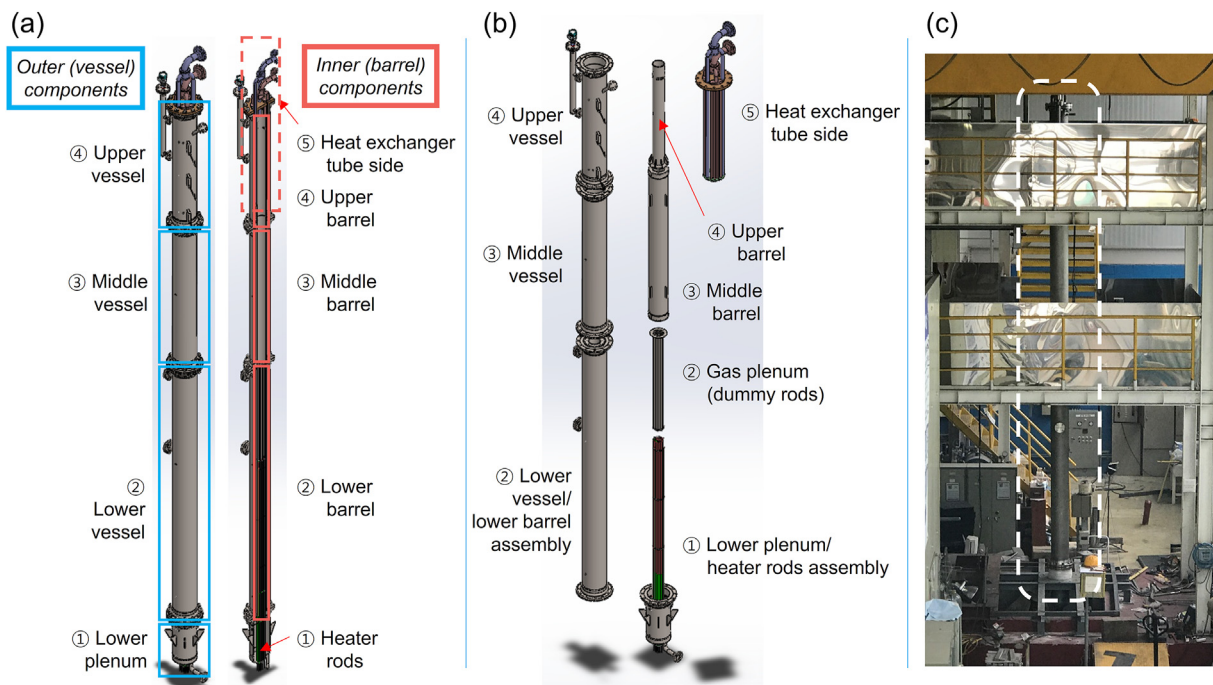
Final design of PILLAR. (a) Isometric (left) and cross-sectional views (right), (b) exploded view, and (c) photograph in which the facility is highlighted with white dashes.
